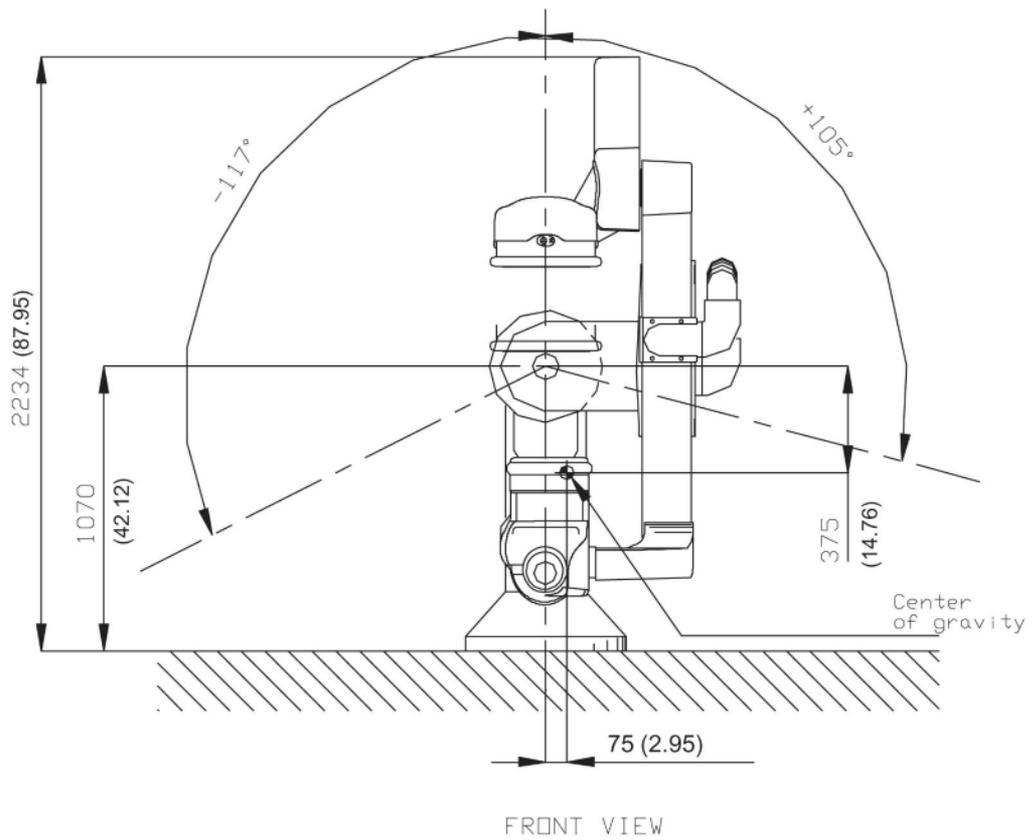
Innova LP4 Positioner Dimensions - Side View
